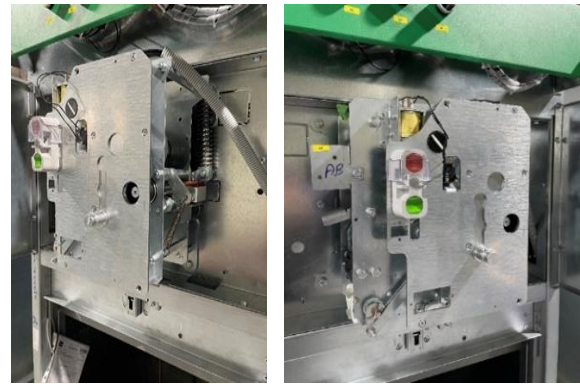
Latest design of non-motorized single-shaft three-position disconnecter mechanism
